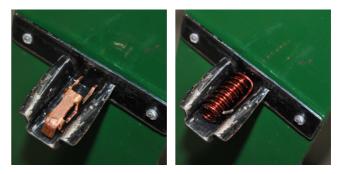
The conveyor step holding two similarly sized subassembly parts.
